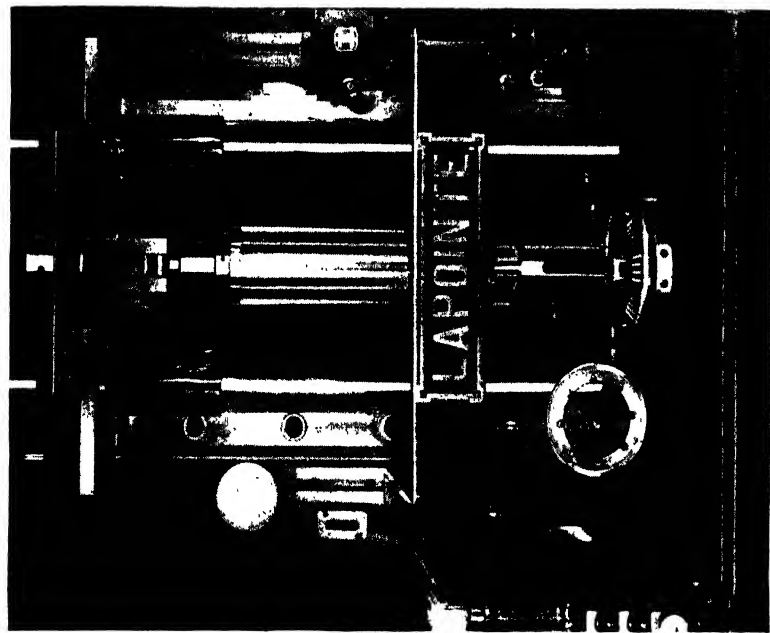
Machine Employed for Broaching Gear Segments to Form Slots
